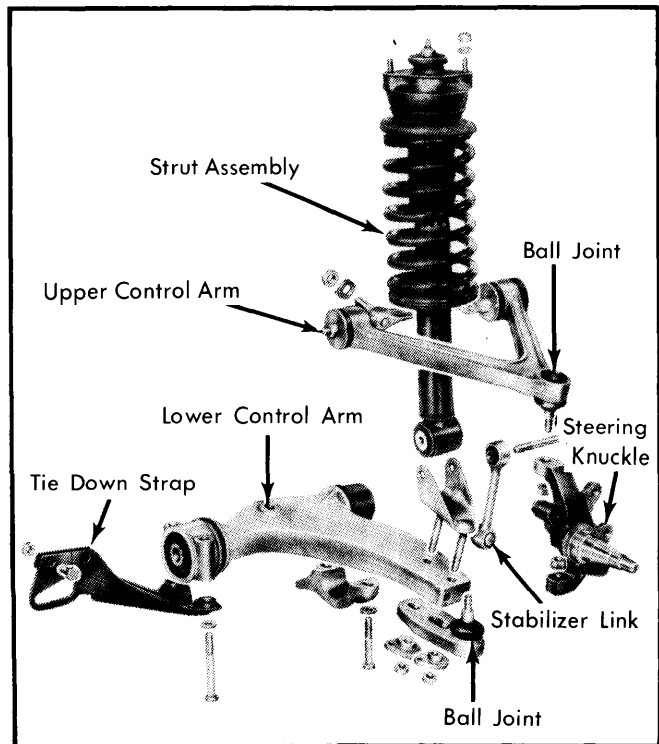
Exploded View of Porsche 928 Front Suspension Assembly
